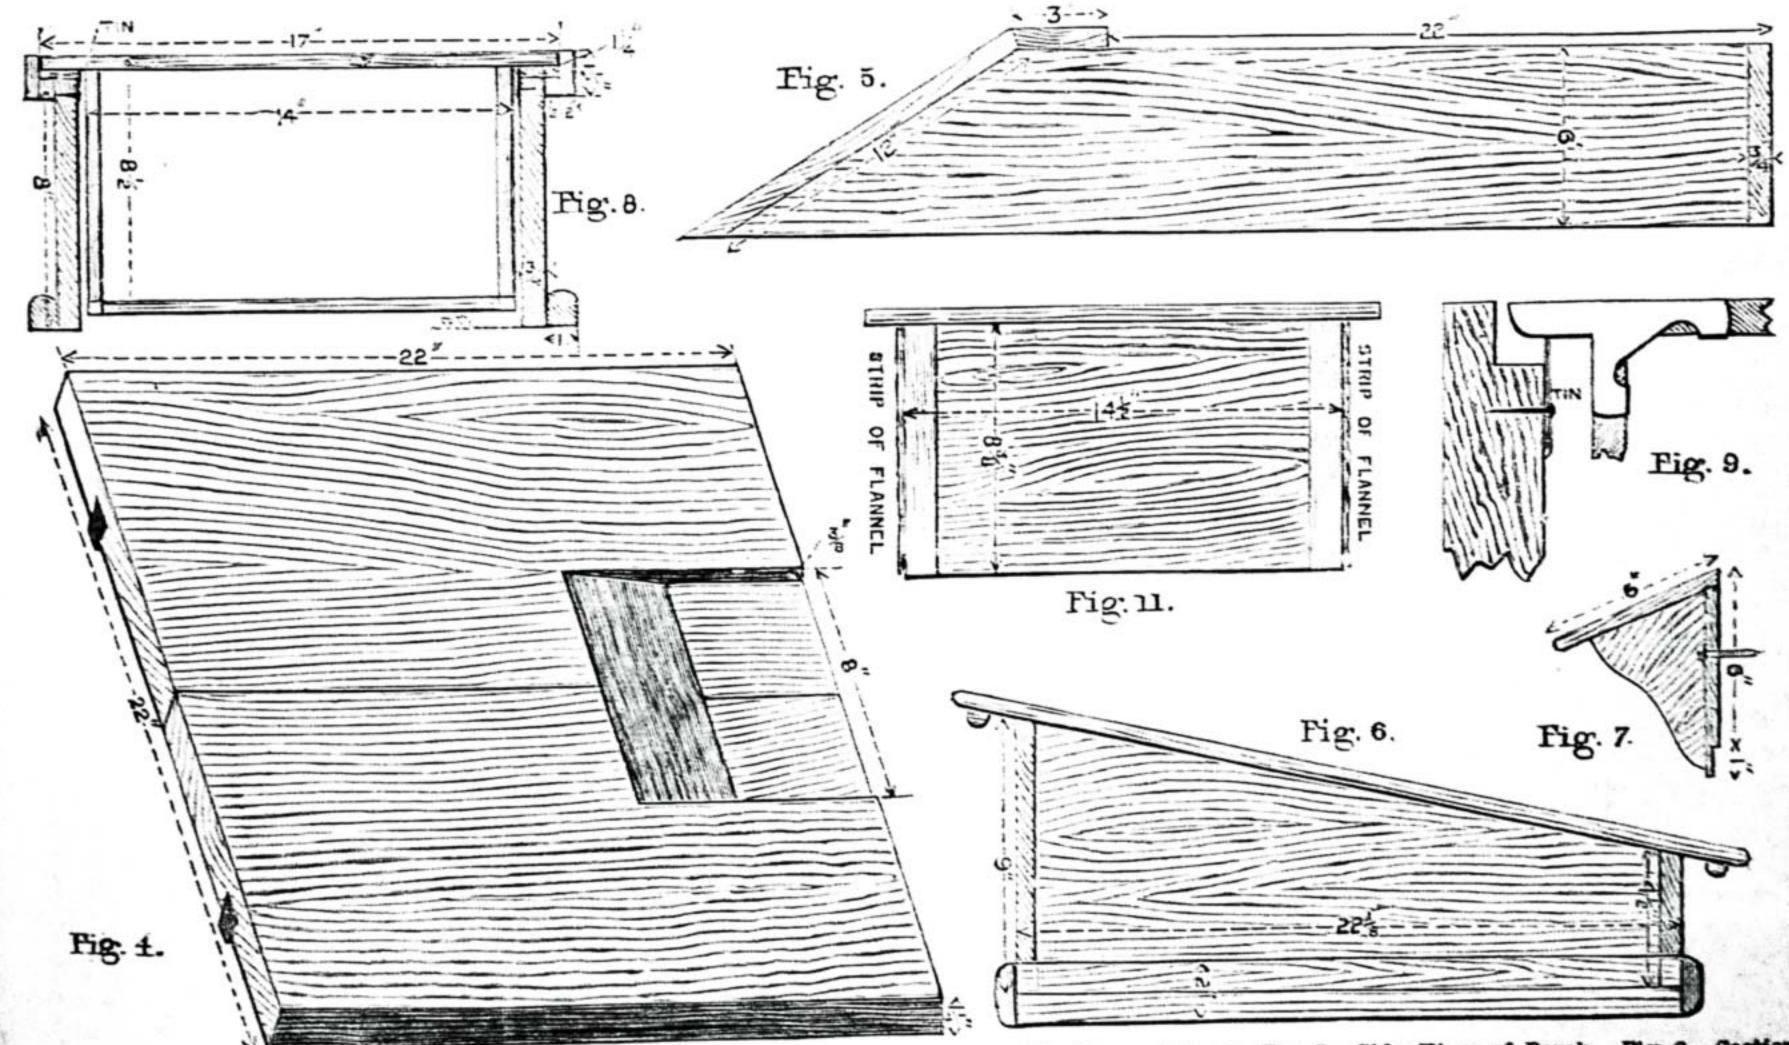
Floor Board. Fig. 5.—Side View of Stand and Alighting Board. Fig. 6.—Side View of Roof. Fig. 7.—Side View of Porch. Fig. 8.—Section showing Frame resting on Tin Slip. Fig. 9.—Section showing Novice's Metal Corner. Fig. 10.—View of Cushion with Feeding Hole. Fig. 11.—View of Division Board. (All figures to scale of 1 in. to 1 ft., except Fig. 9, which is half size, and Fig. 10, which is not to scale.)
